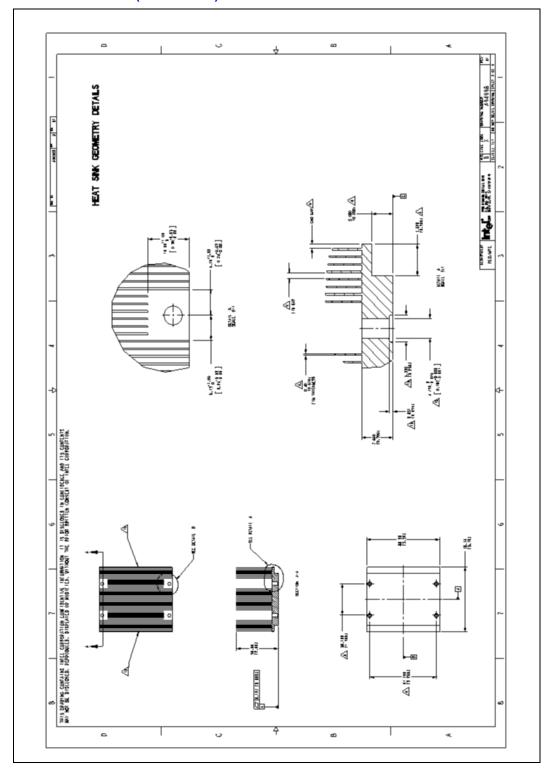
2U CEK Heatsink (Sheet 3 of 4)
